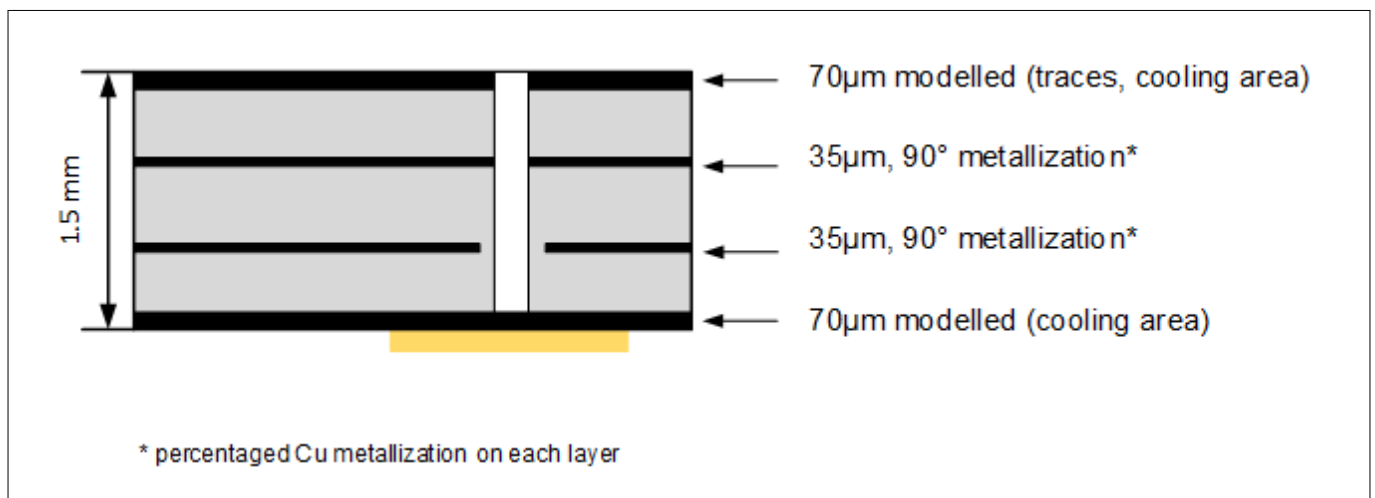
PCB cross section (JEDEC 2s2p) with cooling area
